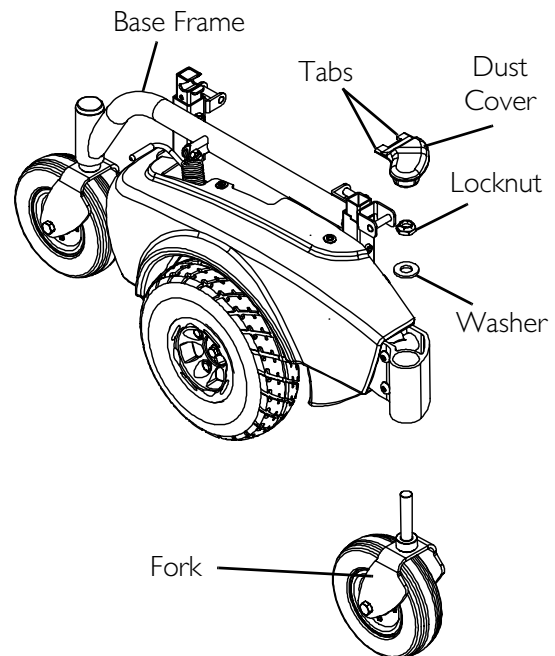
Replacing Front/Rear Caster Assemblies
